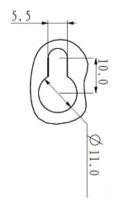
Dimensions: Keyhole in detail (KBox C-101-1 with fan tray option)
